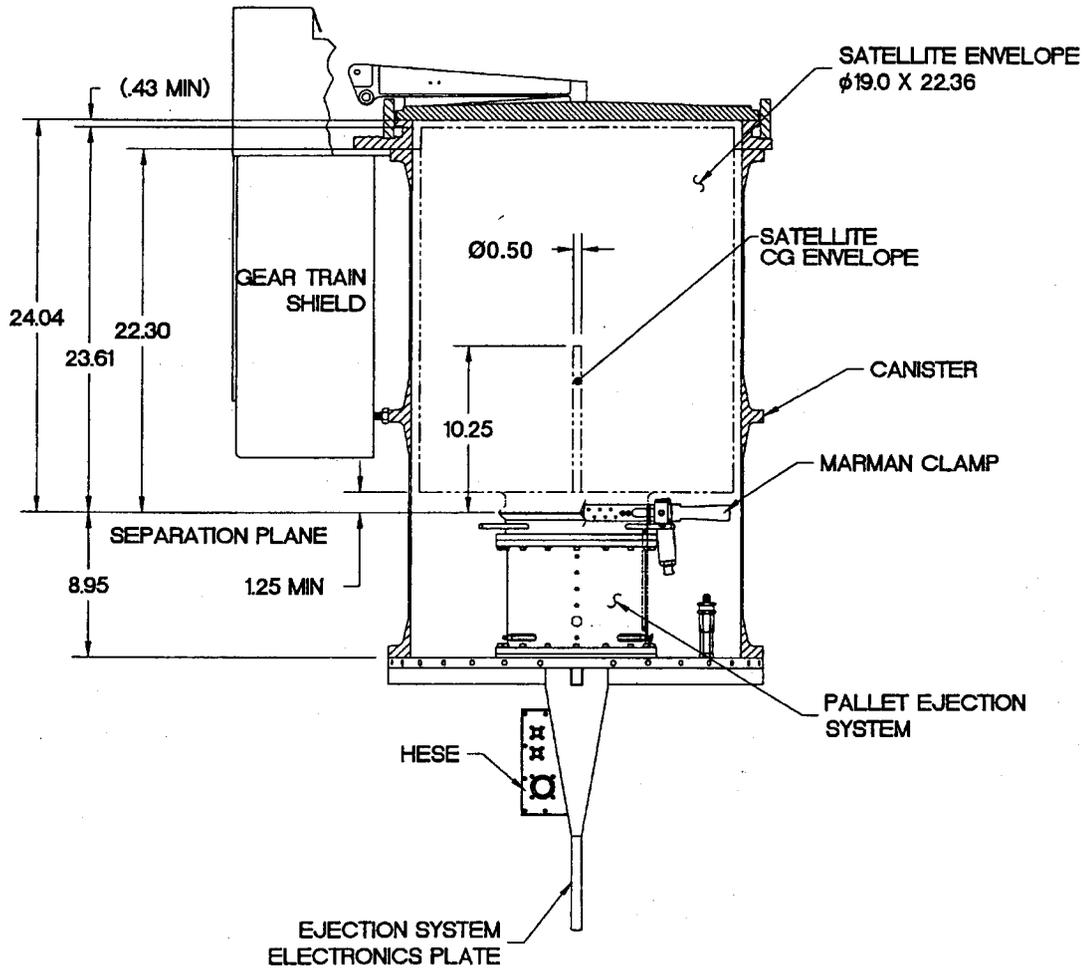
PALLET EJECTION SYSTEM WITH DOOR
